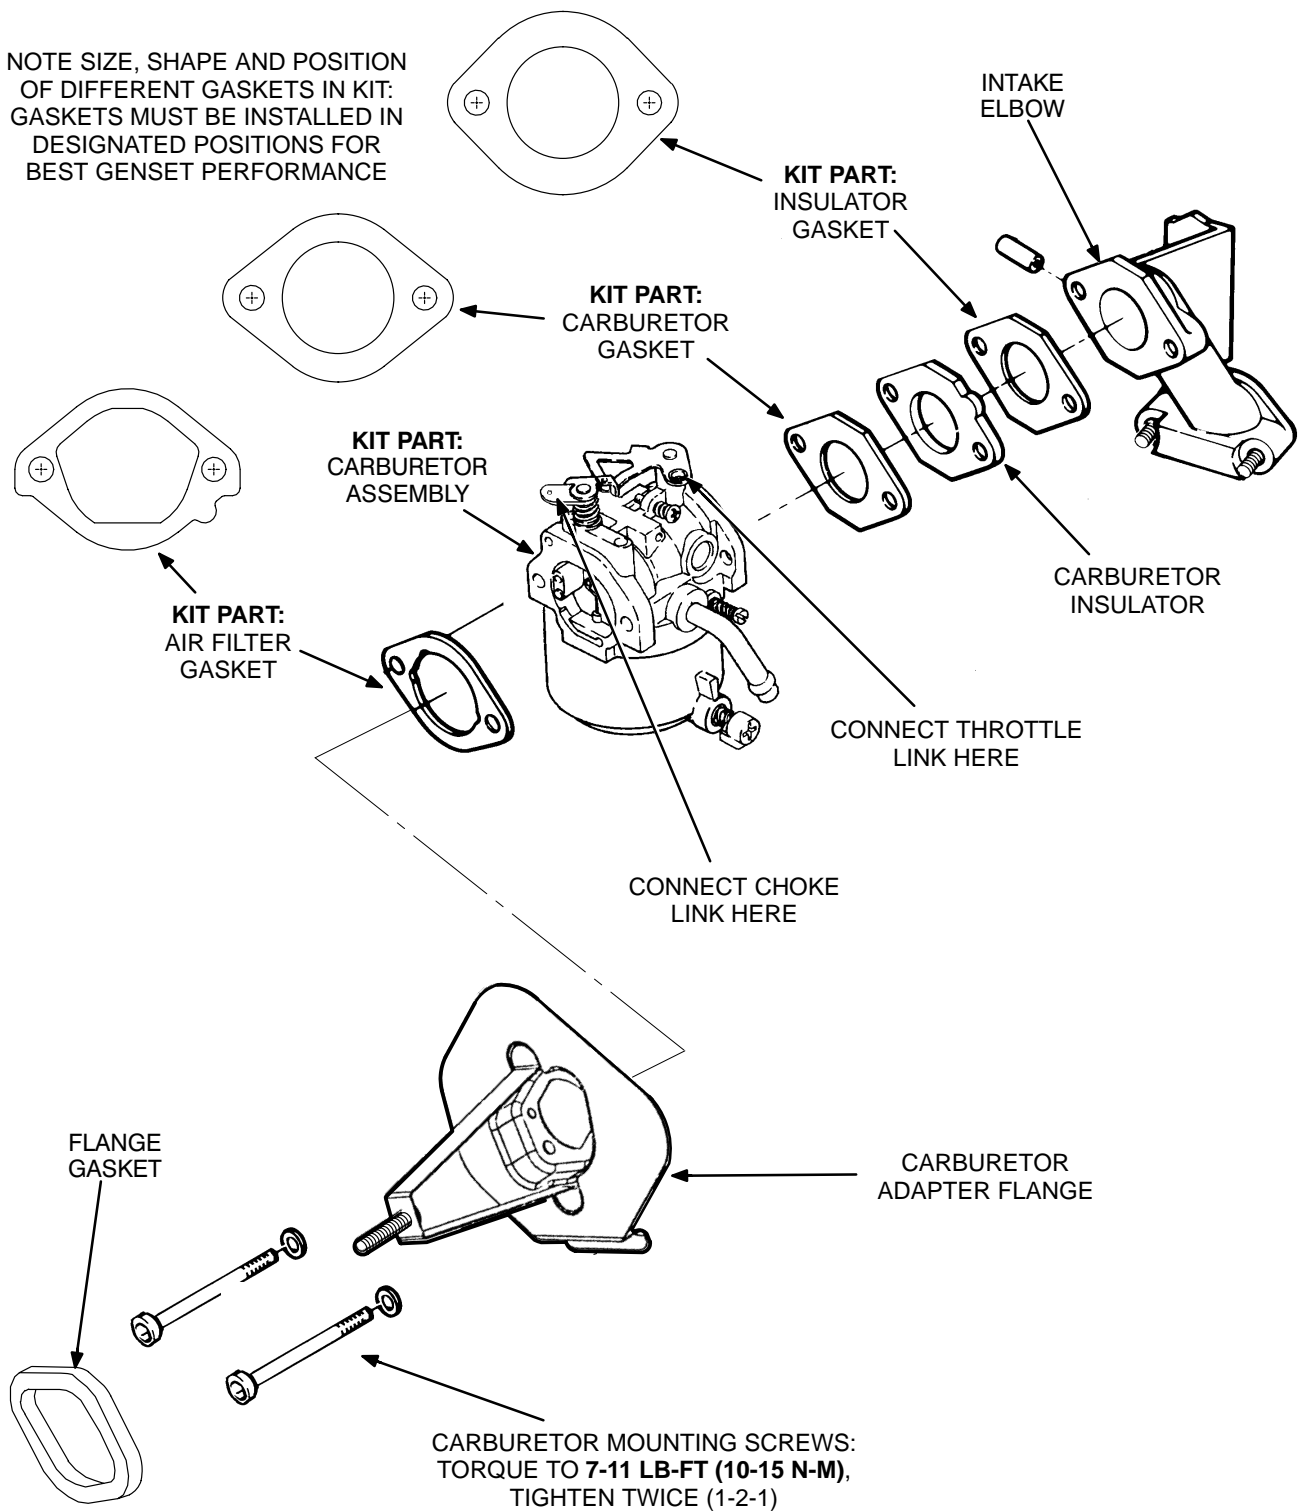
CARBURETOR AND INTAKE MANIFOLD ASSEMBLY
